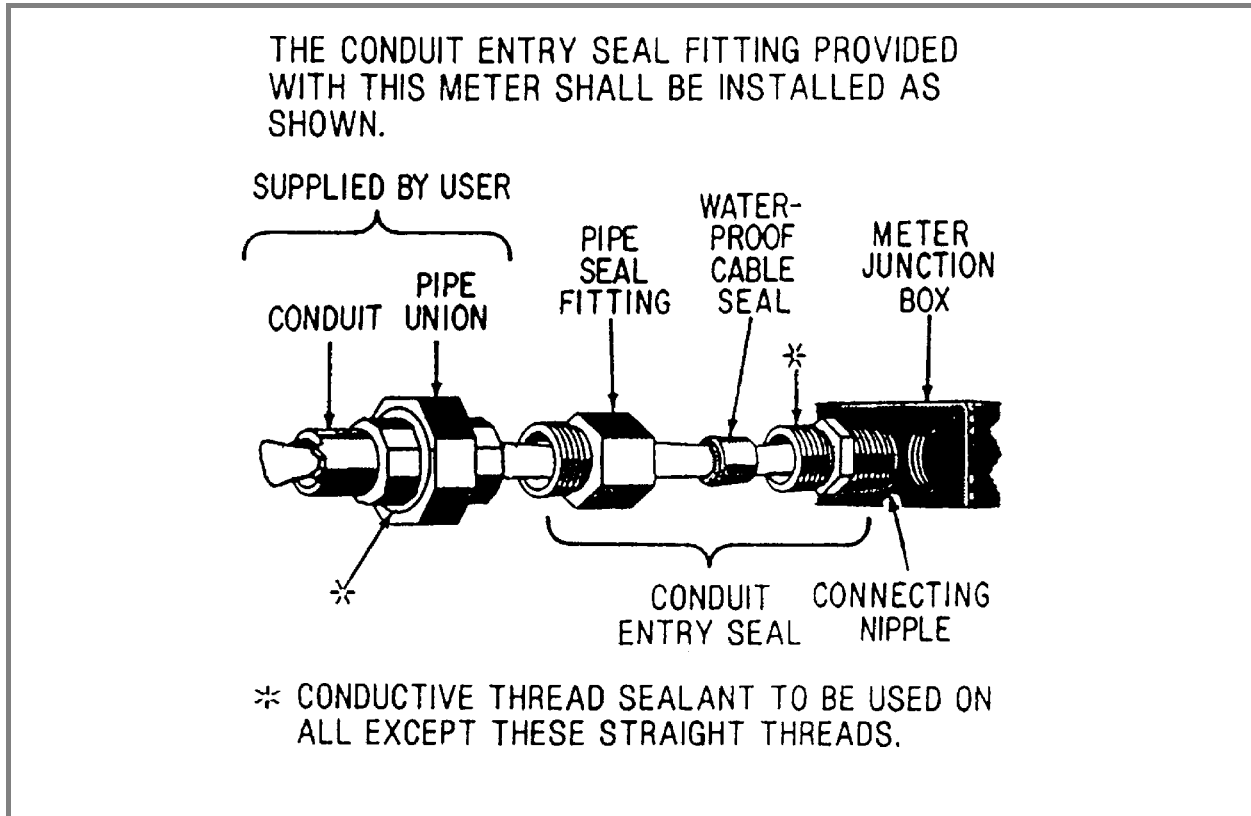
CONDUIT ENTRY SEAL INSTALLATION
